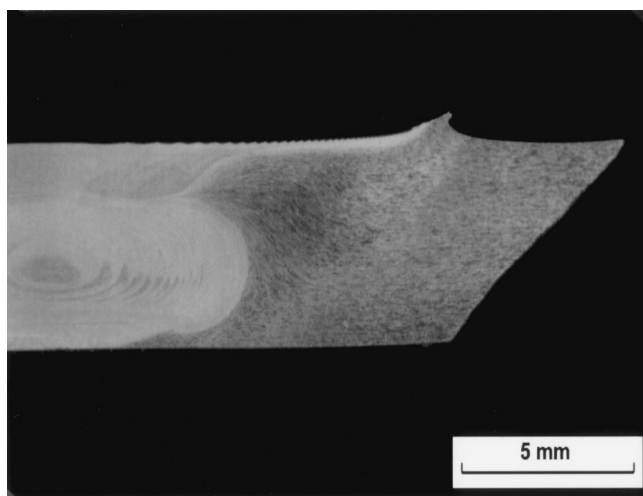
Cross section of a fracture surface of tensile-tested 7075 Al friction stir weld, transverse orientation, as welded. Postweld age condition showed similar fracture behavior.
